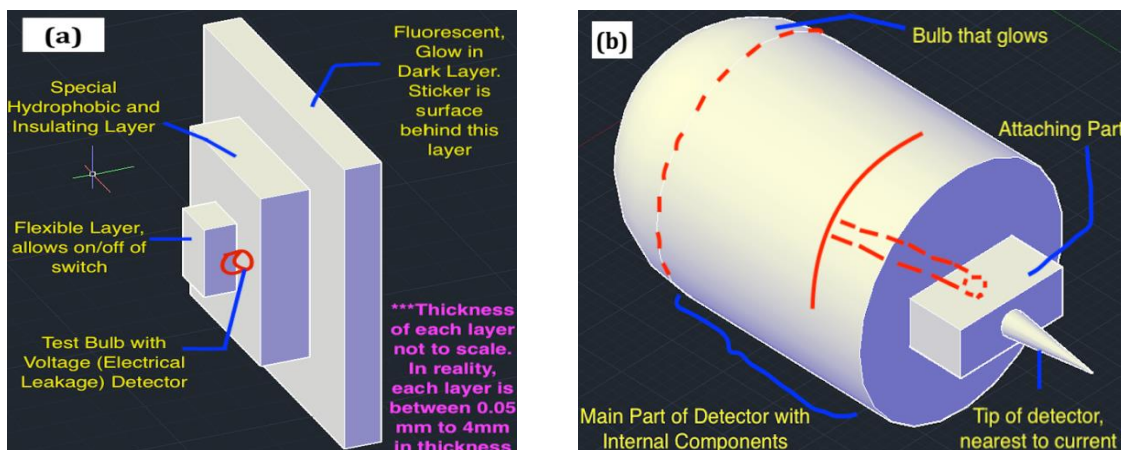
(a) CHASafeties layered electrical safety sticker drawing (b) Test bulb and non-contact Voltage (Electrical Leakage) detector component.
